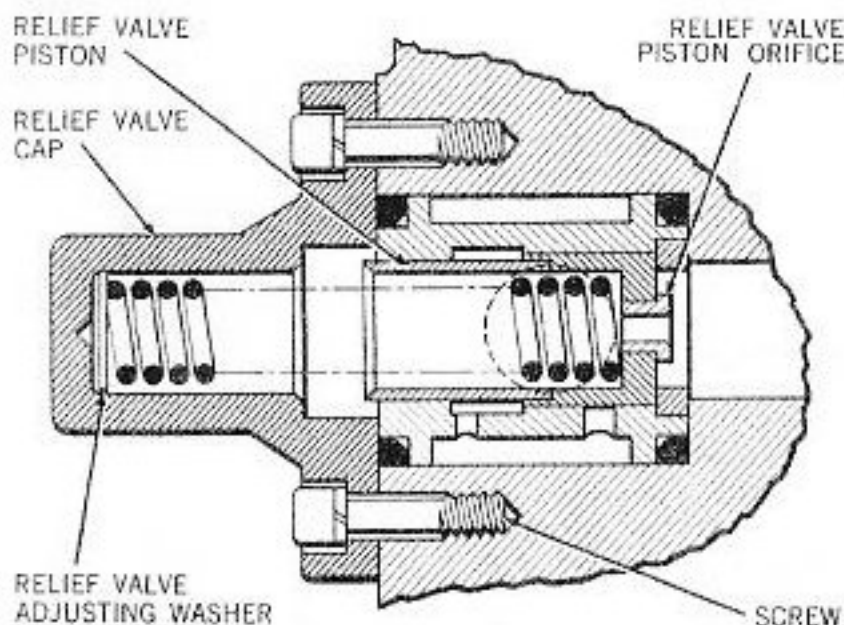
Training Gear B-end Relief Valve Adjustment
